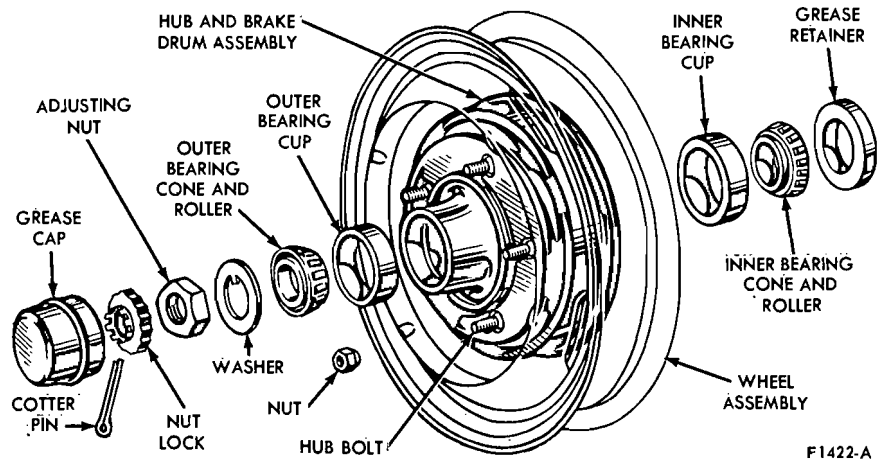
Front Hub, Bearing and Grease Retainer Drum Brakes
